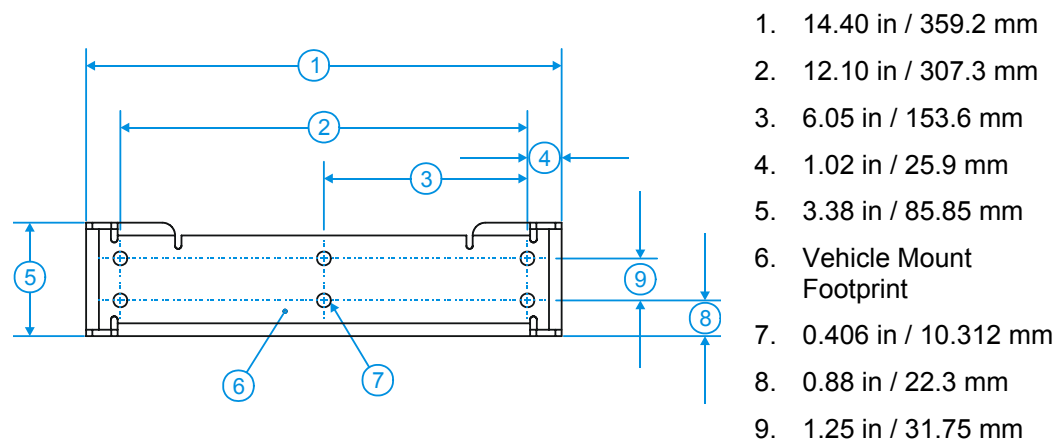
VX5 Bracket - Mounting Dimensions (Not To Scale)
